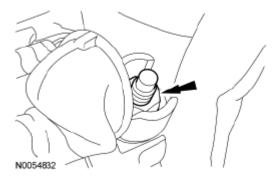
Locating Generator B+ Cable Courtesy of FORD MOTOR CO.
